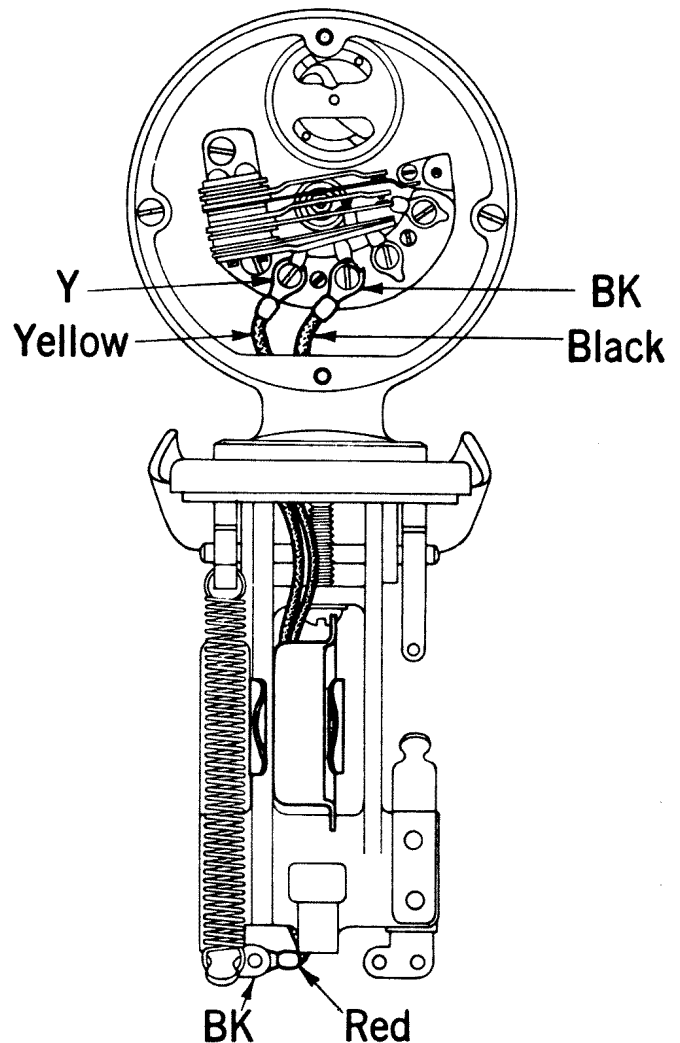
61J Filter Shown in E-Type Hand Set Mounting
